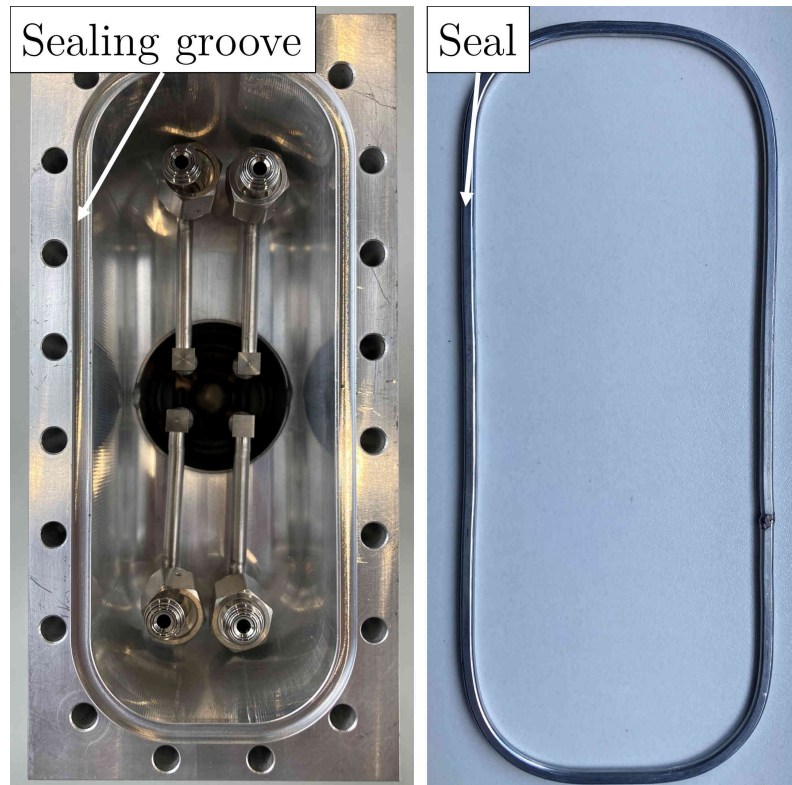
Vacuum box with sealing groove (and moderator assembly inside, left) and deformed aluminum round-wire seal (right).
